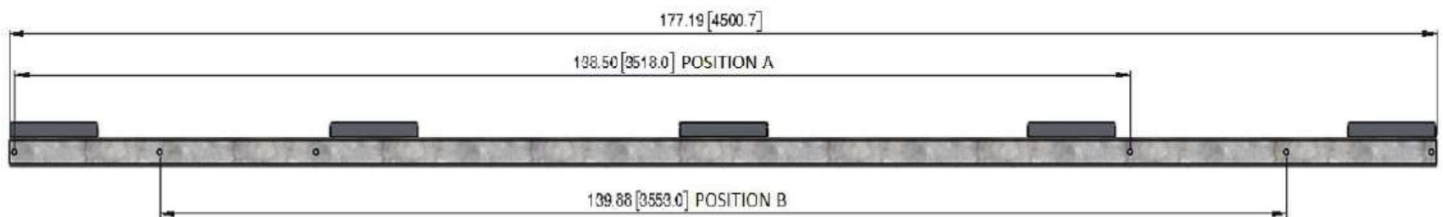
8 Module Steel Tube Rail Mounting Holes – Front
